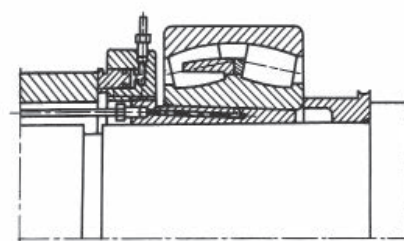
Bearing mounting on a pressed sleeve adapted for hydraulic assembly
